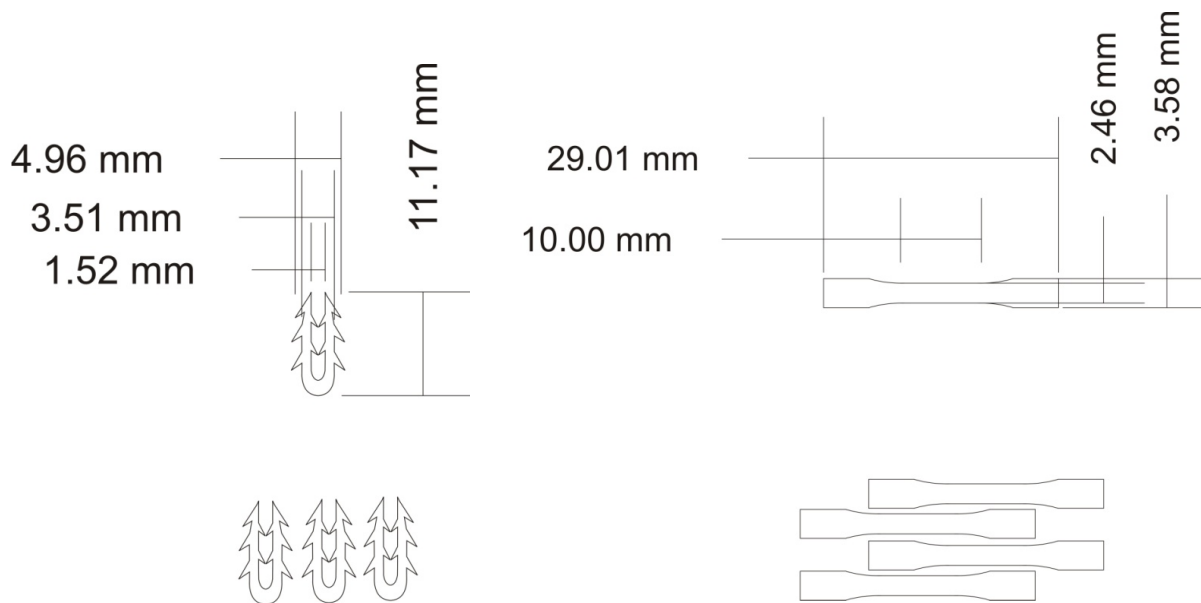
Dimensions for staples and test specimens as drawn in Corel Draw X3
